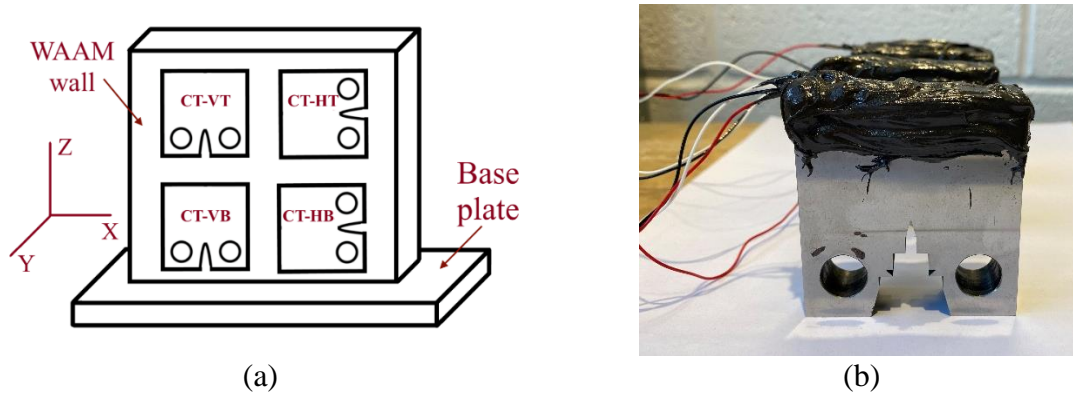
(a) Specimen extraction plan from the WAAM wall, (b) specimens with protective coating after strain gauging
